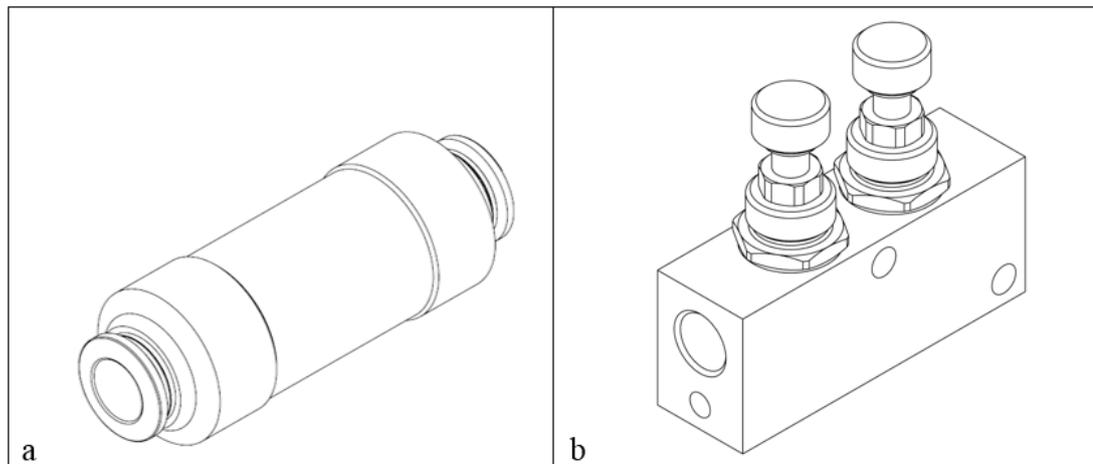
a) Check valve (Festo 2016f, p. 1), b) One way flow control valve (Festo 2016c, p. 1).
